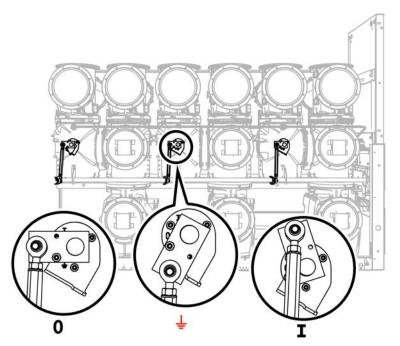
Rear position indicator at the disconnector housing for busbar system 2
